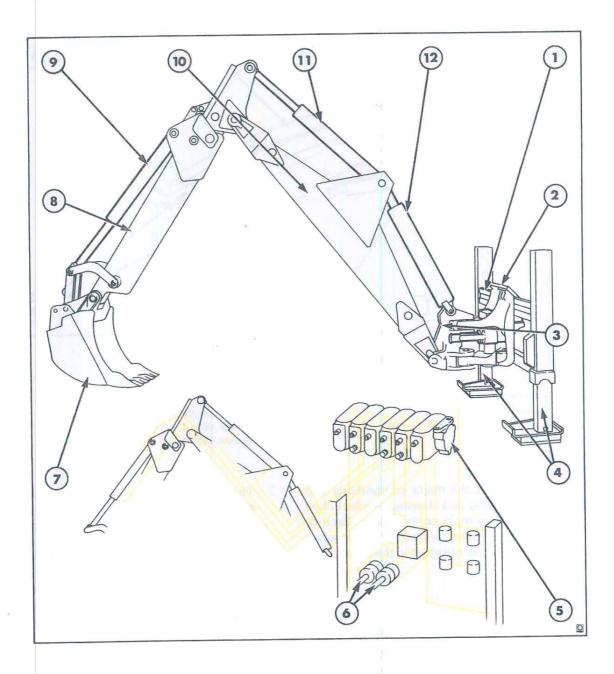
Backhoe Assembly and Hydraulic Circuit Schematic (side shift shown)
